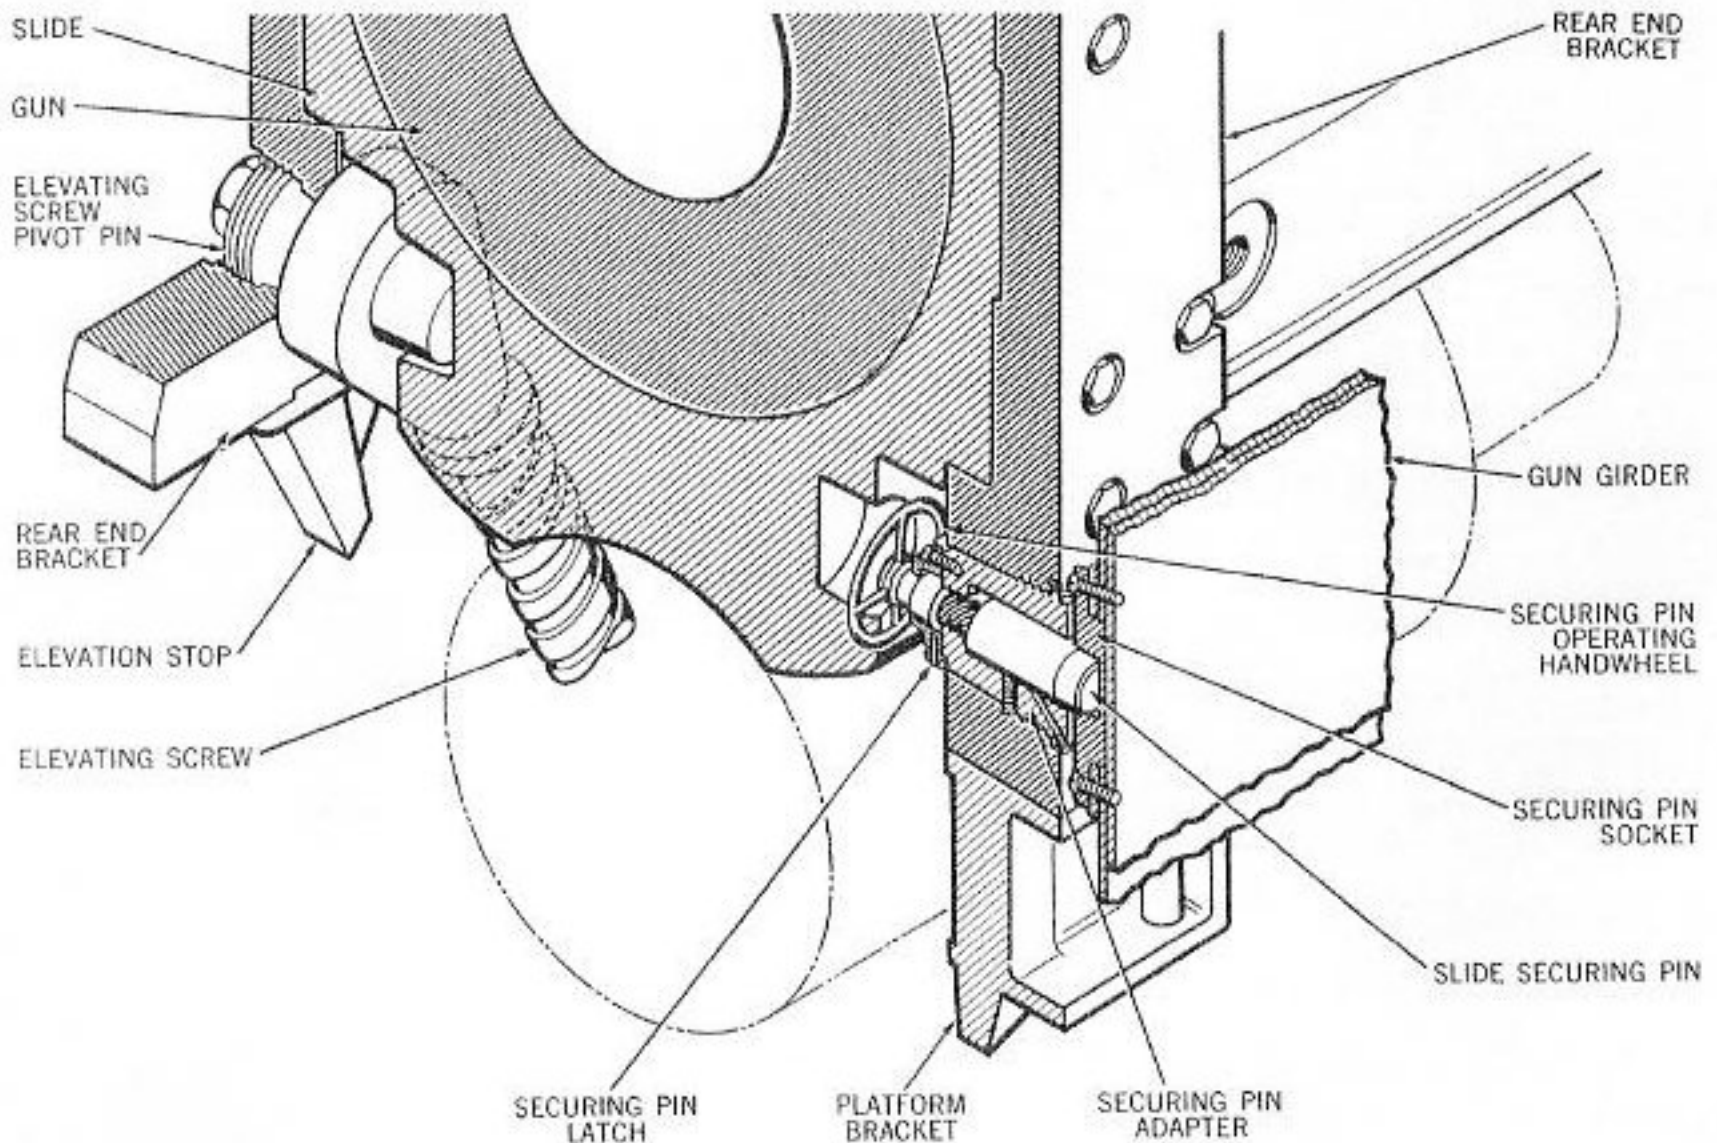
Slide Rear End Brackets, Slide Securing Device and Elevating Screw Pin, Sectional View
